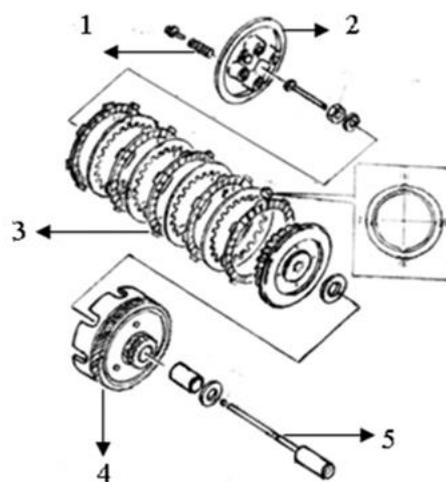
Parts of clutch mechanism: (1) Clutch spring, (2) Spring mount, (3) Clutch disc, (4) Clutch house (primary), and (5) Push rod [1]
